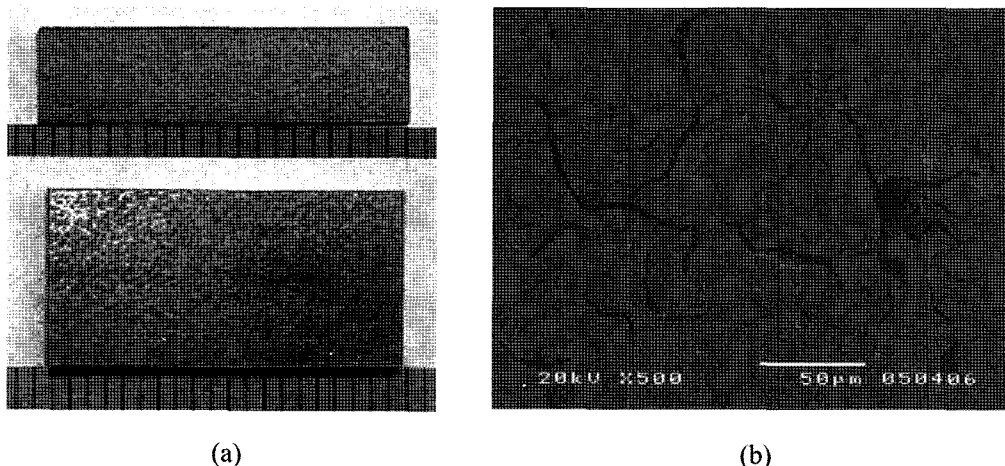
(a) Surface morphology, (b) SEM micrograph of casting iron after cutting.
